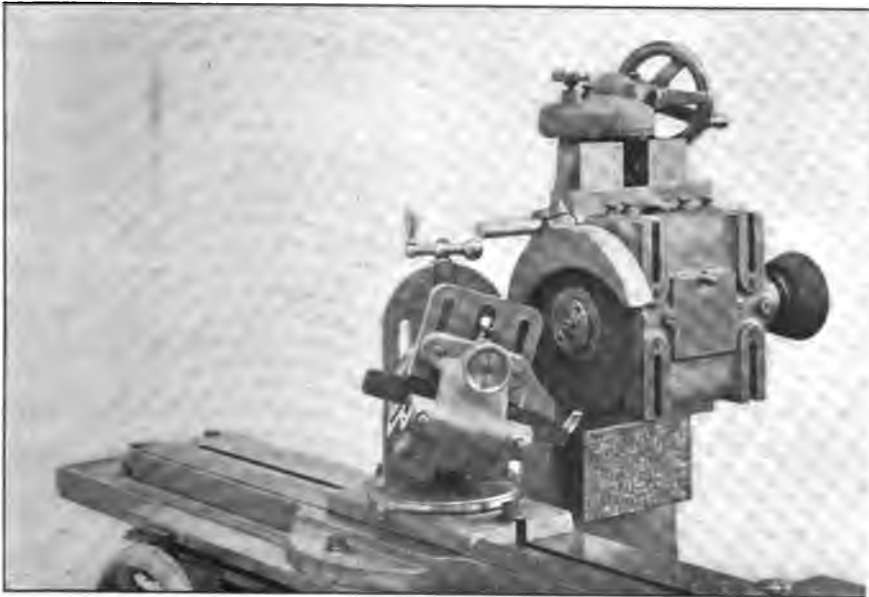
In shops using relatively few tools, a grinder resembling this Brown & Sharpe machine is very desirable, since it is available for practically all classes of tools, including those of the lathe and planer class.
